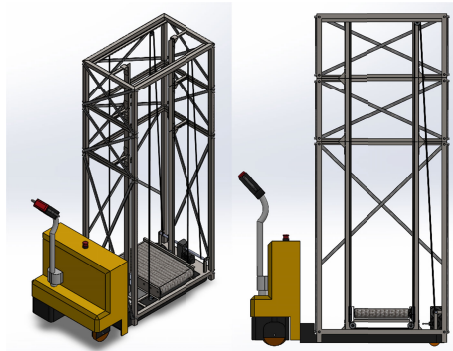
Elevator subsystem CAD - Embodiment design Phase.
